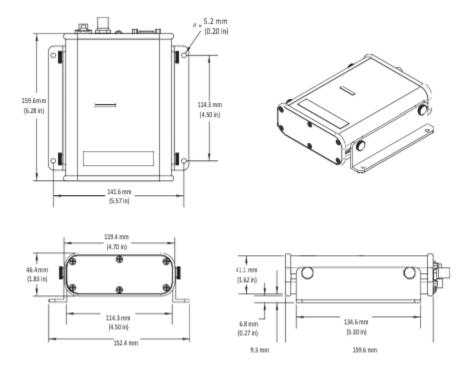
R330<sup>™</sup> Dimensions (with Mounting Brackets)
